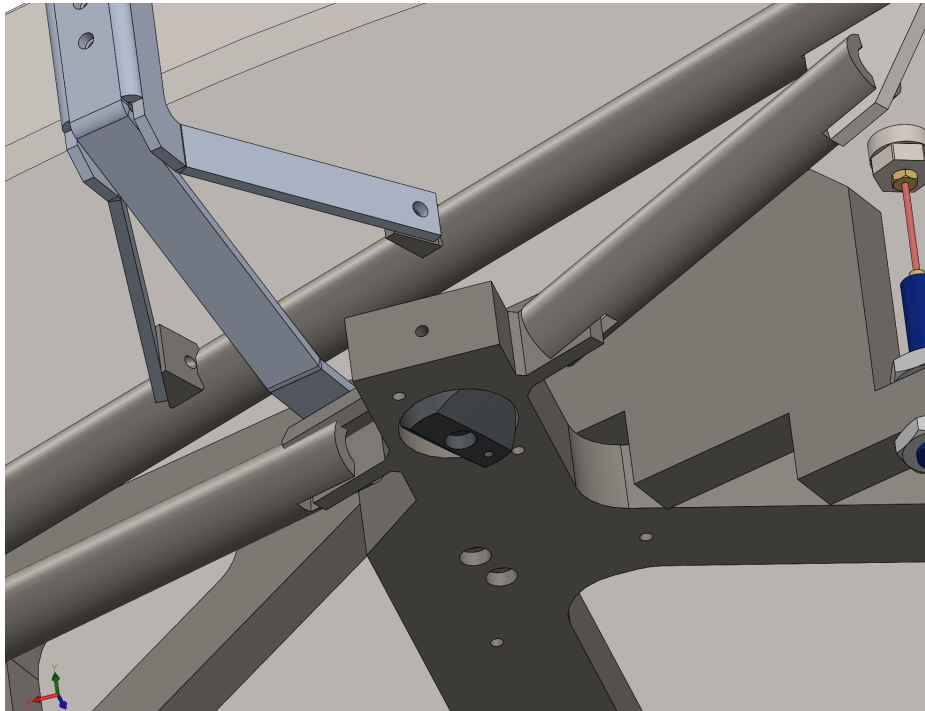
At the center of the image is the kinematic coupling (sphere) for attaching the mirror assembly to the swing arm assembly.
